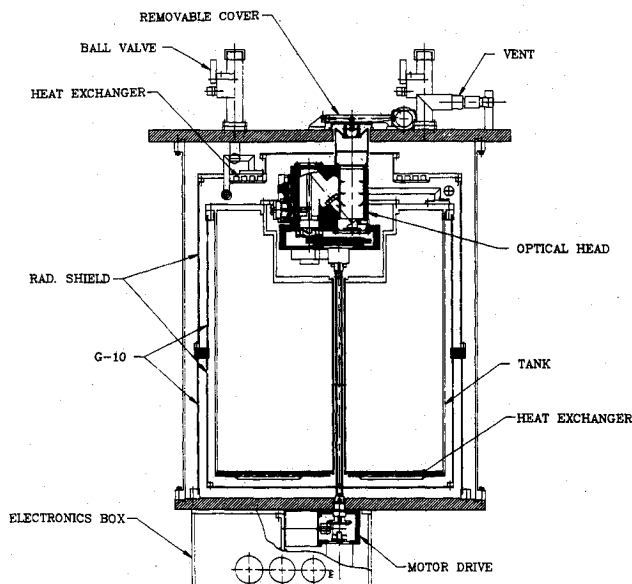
SKIRT CVF drawing showing major components. This assembly mounts into the NASA Get Away Special can.
